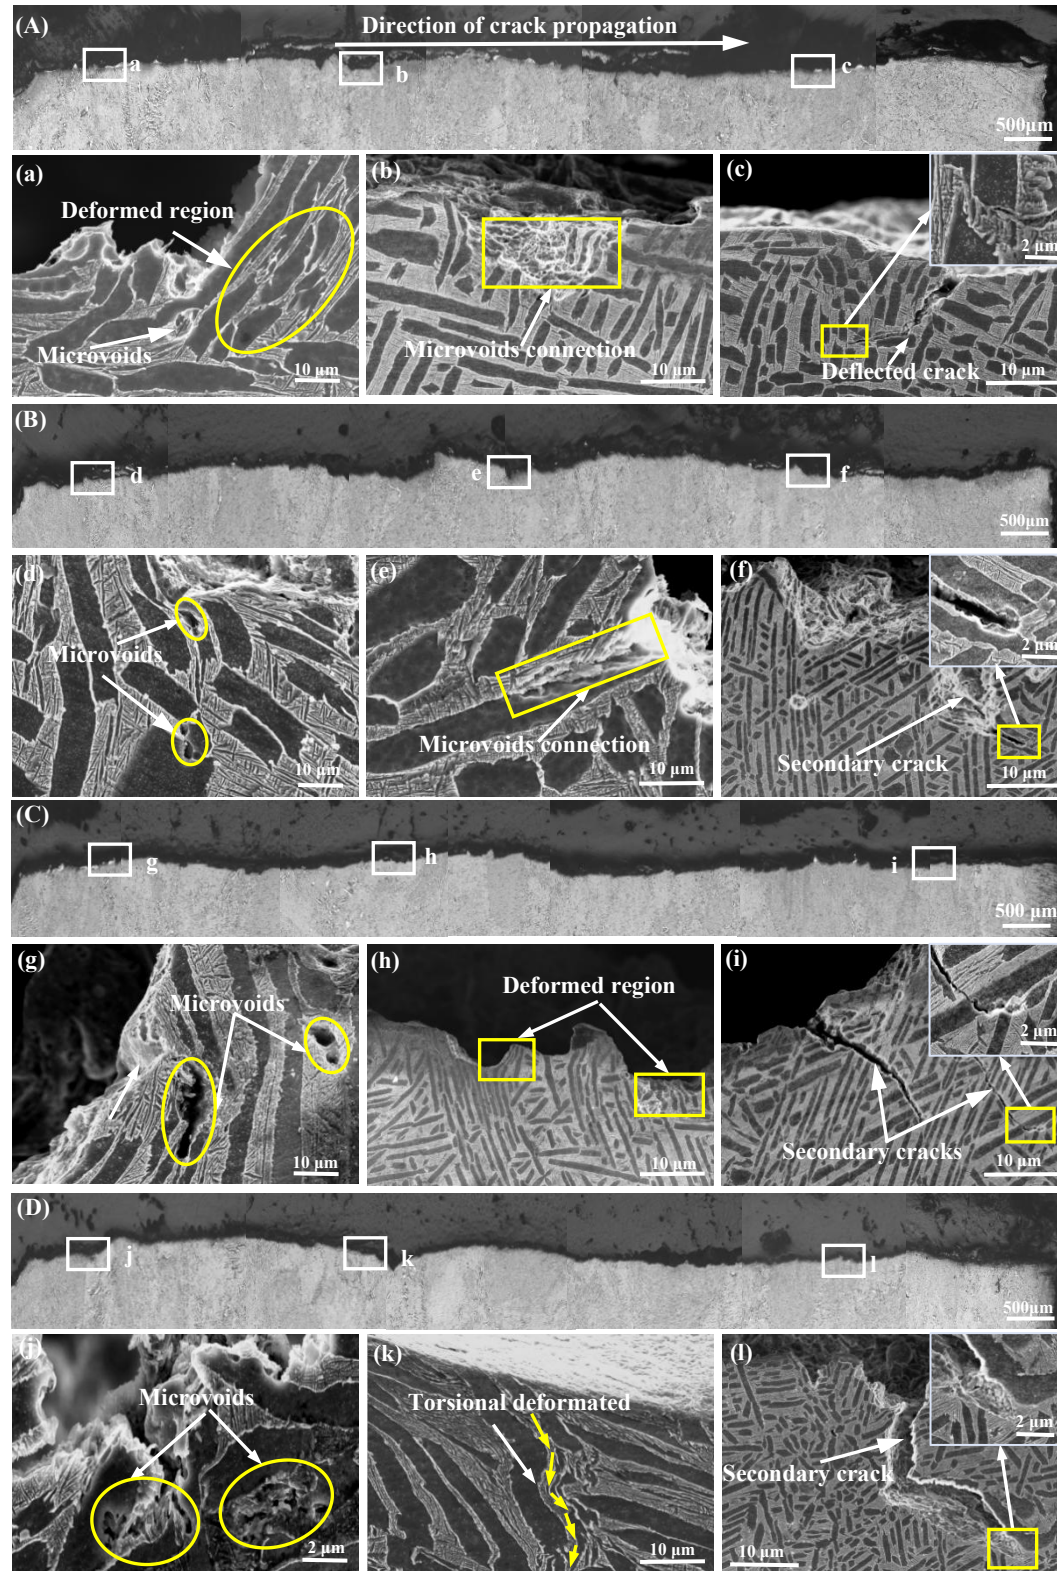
Fracture profile of CT specimens at different forging parameters: (a-c) specimen A; (d-f) specimen B; (g-h) specimen C; (j-l) specimen D; (A) - (D) macroscopic fracture profile; (a), (d), (g) and (j) microvoids and deformed regions were observed near the crack initiation region; (b), (e), (h) and (k) microvoids and microstructural deformation in the crack propagation region; (c), (f), (i) and (l) plastic deformation zone at the secondary crack tip.
